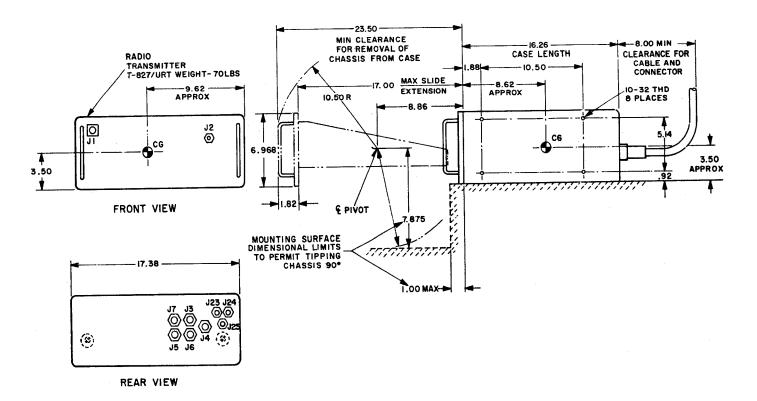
Radio Transmitter T-827/URT, Dimensions
